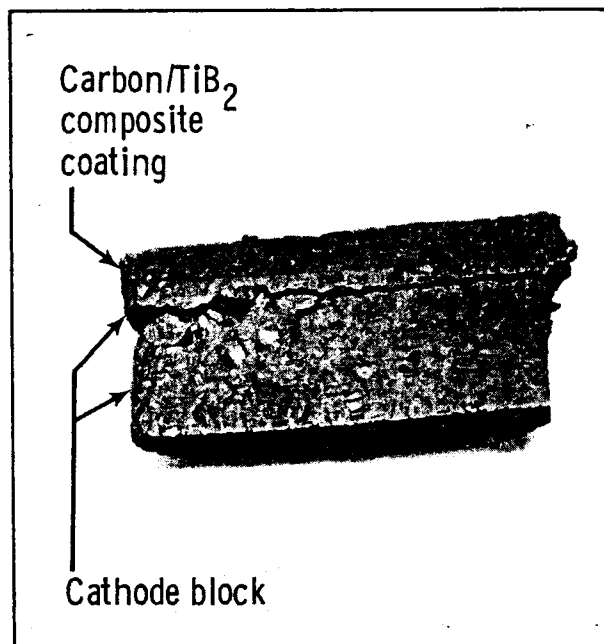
Example of Block Fracture Caused By Excessive Coating Shrinkage
